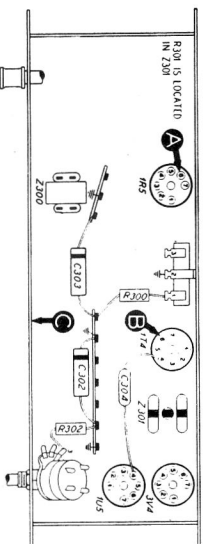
Bottom View, Showing Section 3 Test Points TP-5554C
